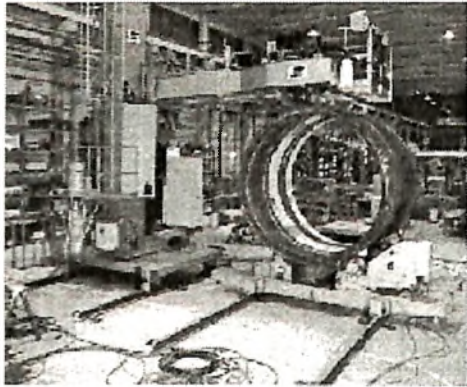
Railbound column & boom and roller bed for welding of cylindrical objects
